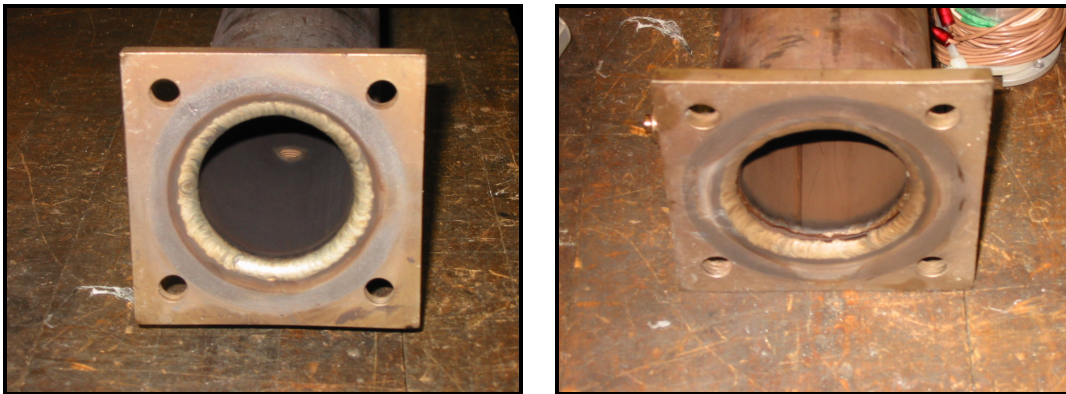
Photographs of the circumferential weld attaching the end plate to the inner tube on the heat exchanger before use (left) and after failure (right)
